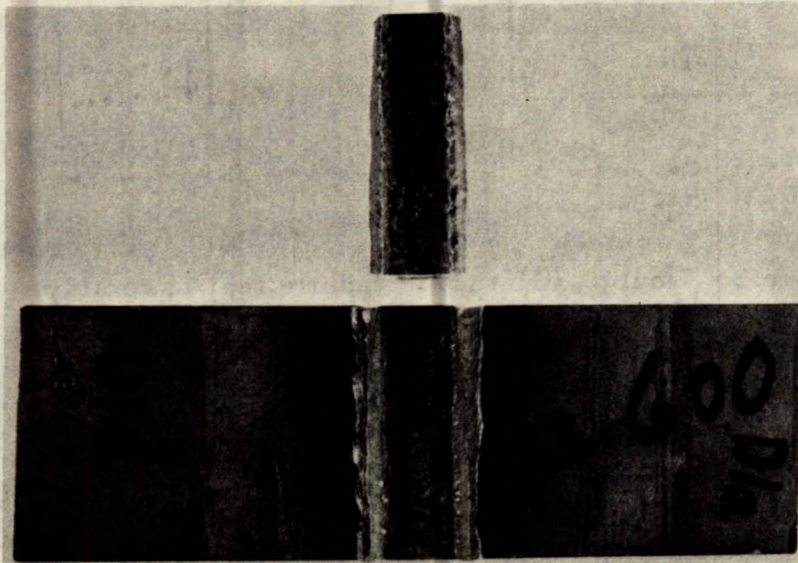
Double-fillet-weld test assembly, after tensile fracture (vertical limb inverted)
